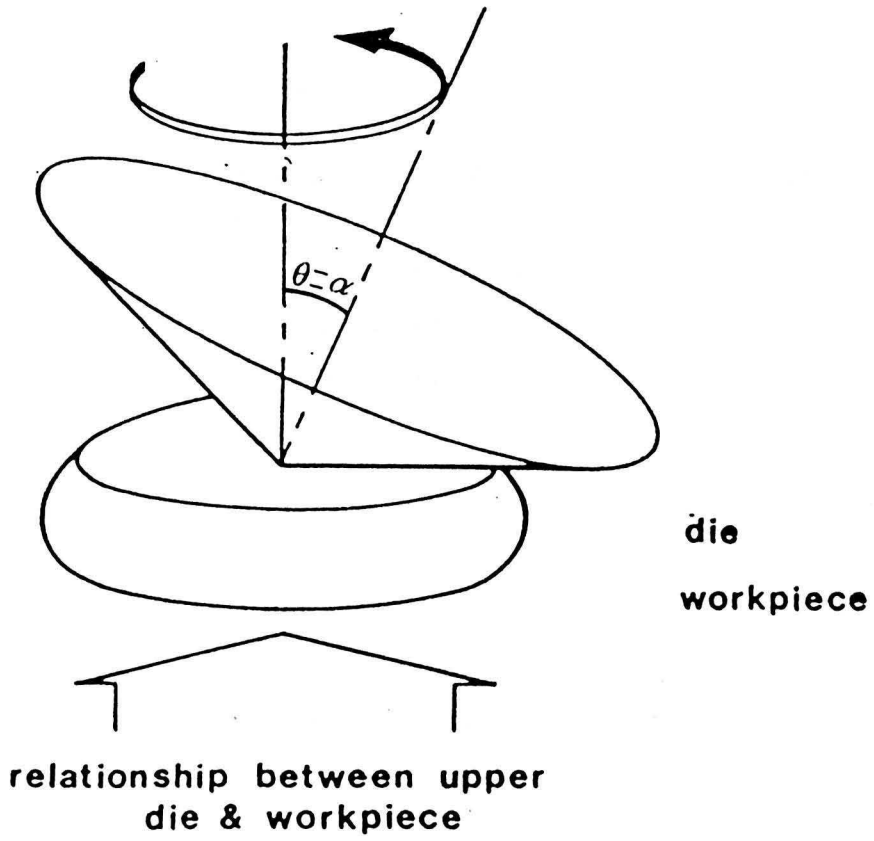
Illustration of tool/workpiece arrangement representing three Eulerian angles of:
